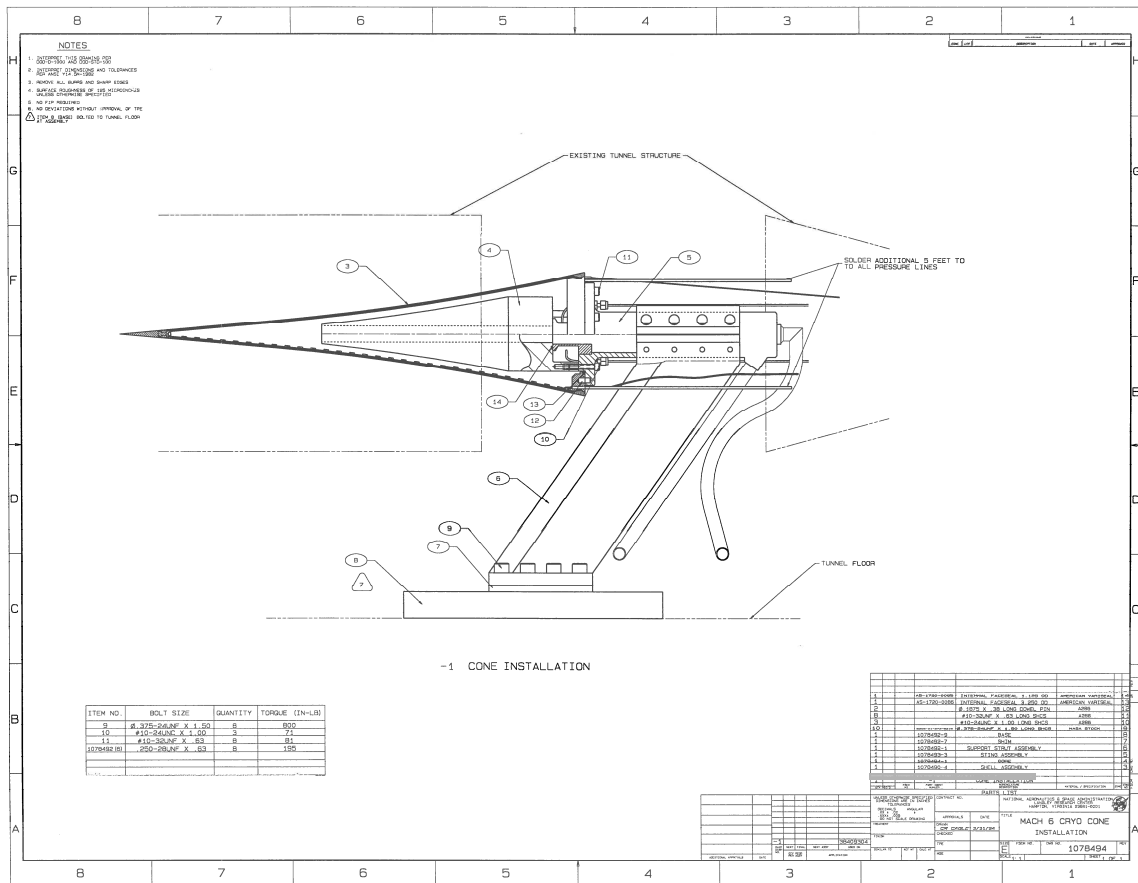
One of the drawings used to manufacture the 91-6 cone model.
